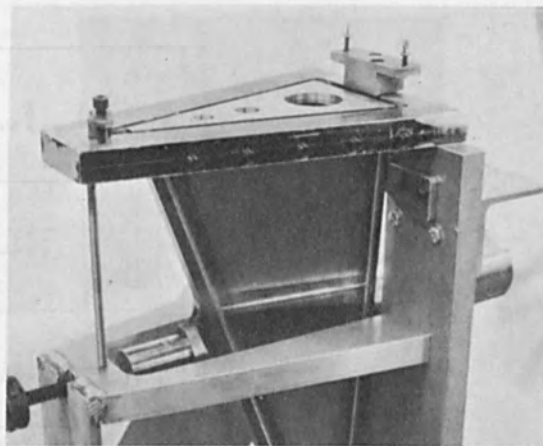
Weld holding fixture for end butt weld with one vane in proper welding location.
